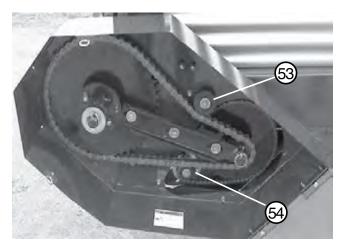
HYDRAULIC REAR UNLOAD SHOWN
